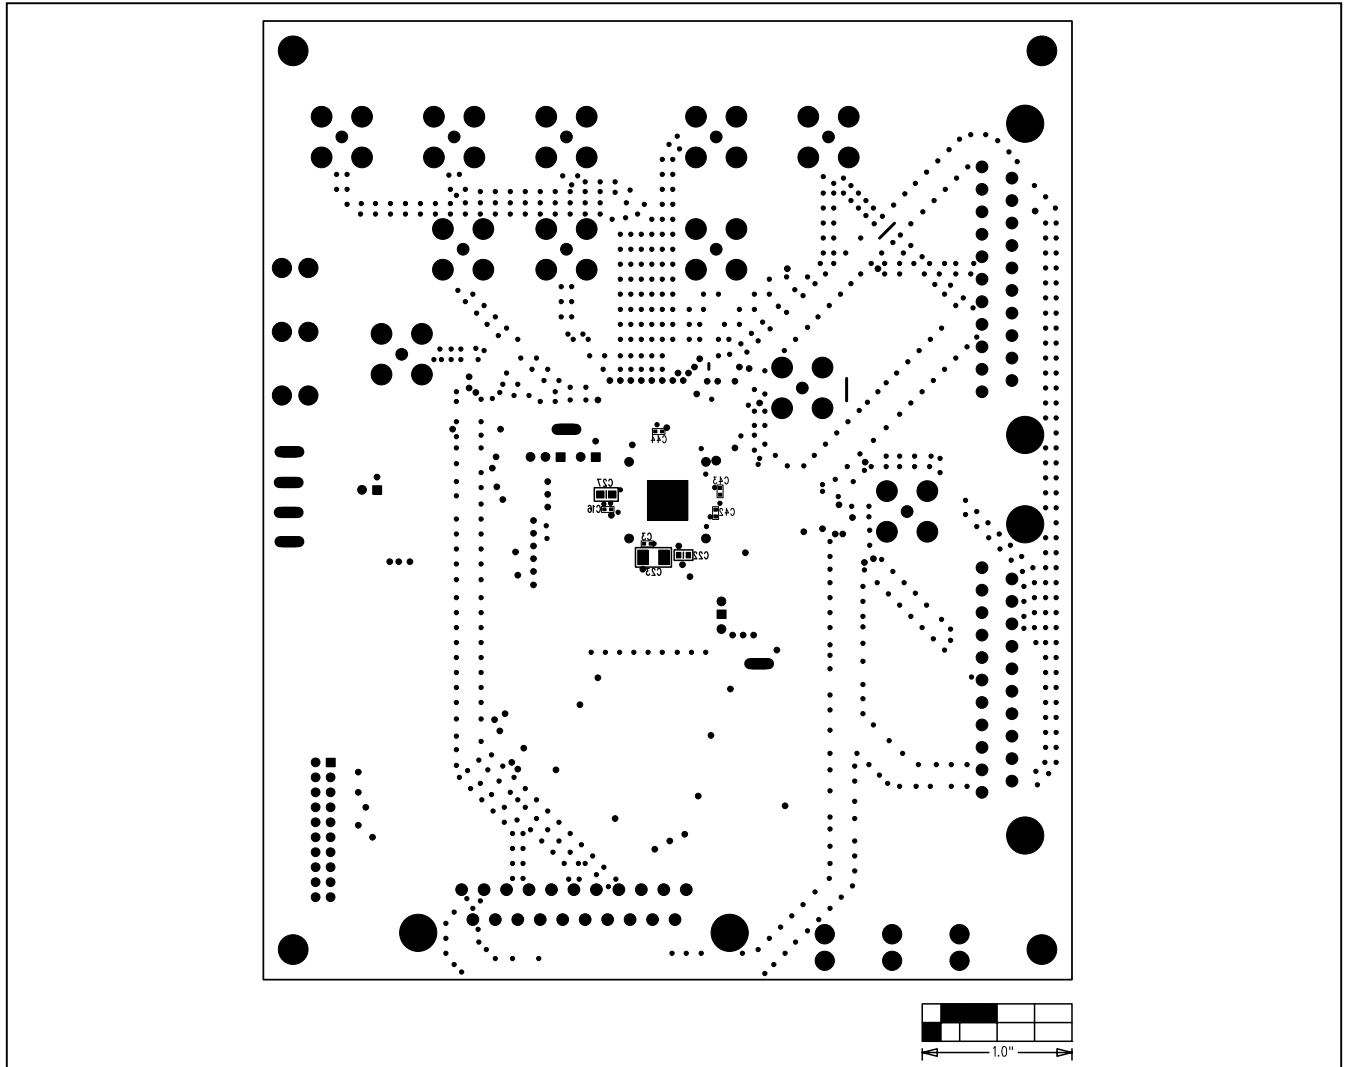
MAX4399 EV Kit Component Placement Guide—Solder Side
